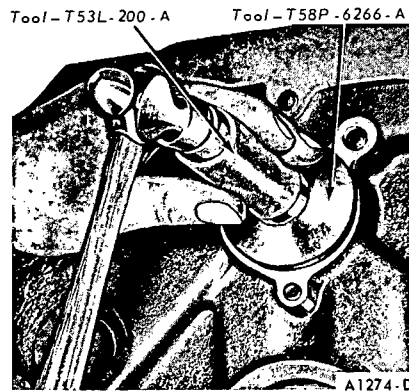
Camshaft Rear Bearing Bore Plug Installation
